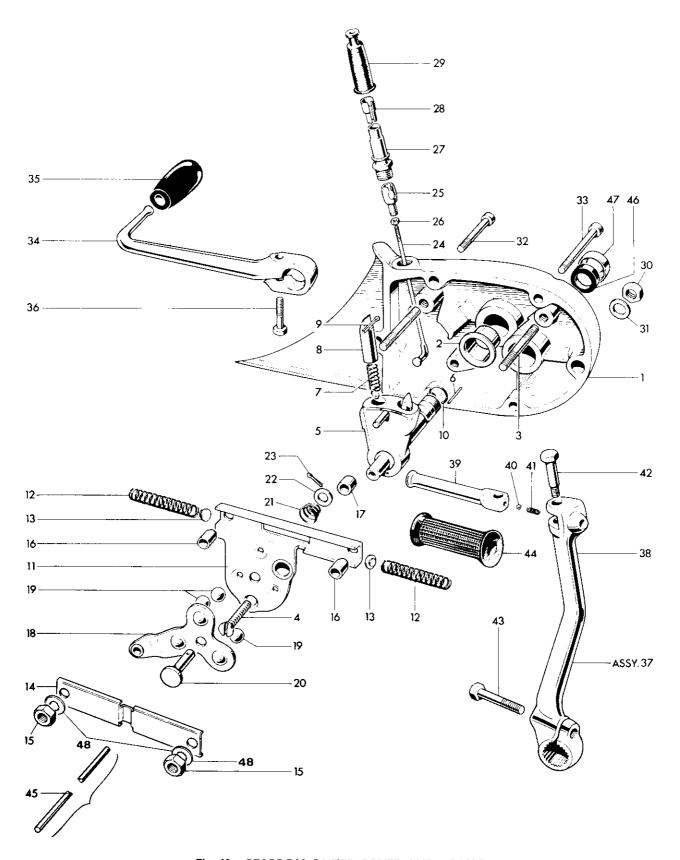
GEARBOX OUTER COVER AND LEVERS
